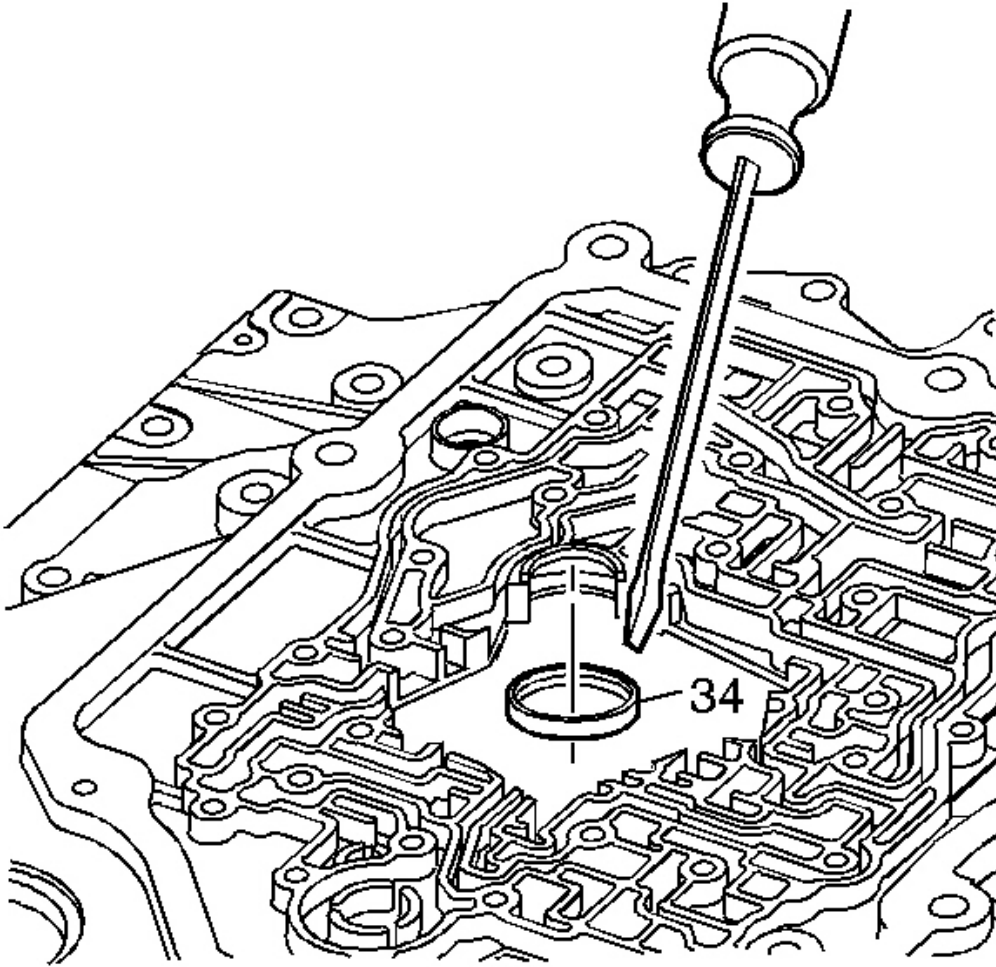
Removing Case Cover To Drive Sprocket Seal
